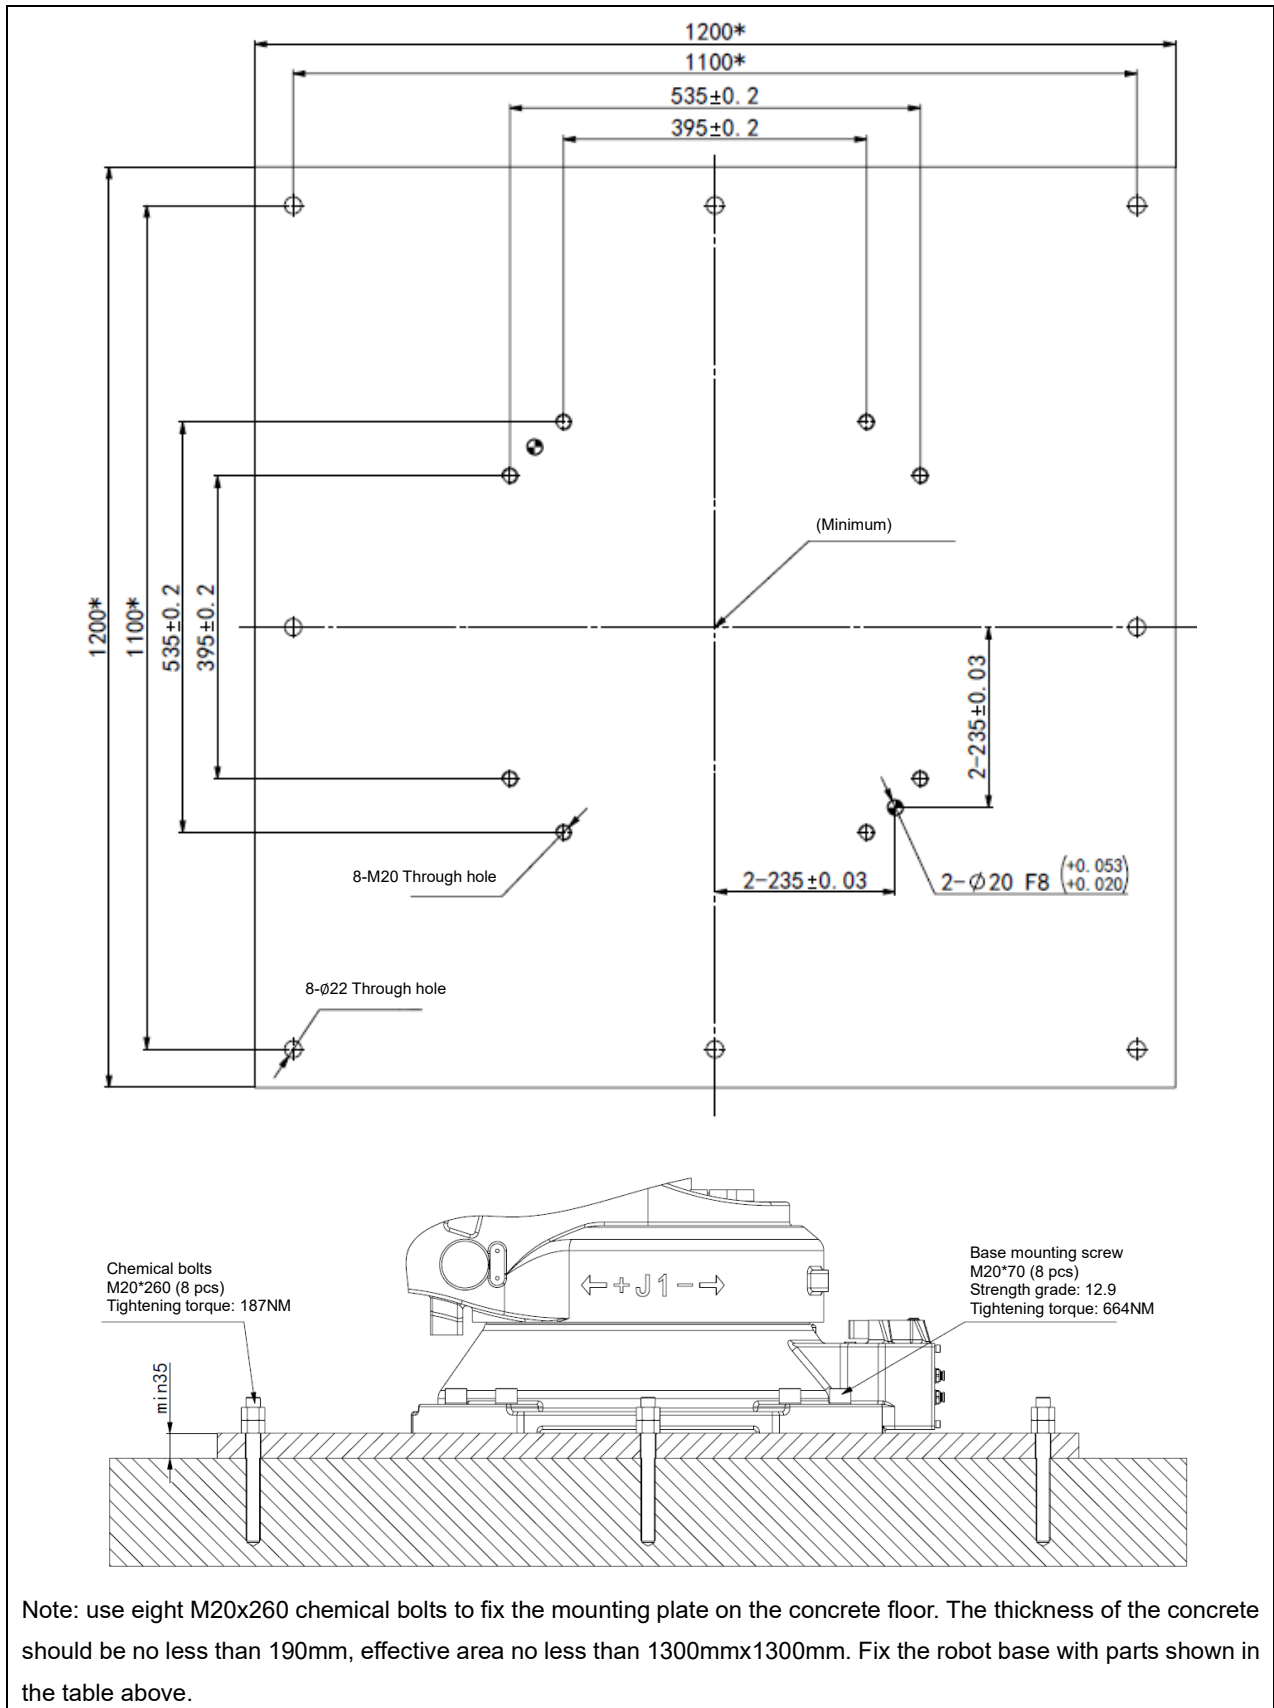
Robot mounting plate dimension and mounting method (ER100B-3500-DW)
